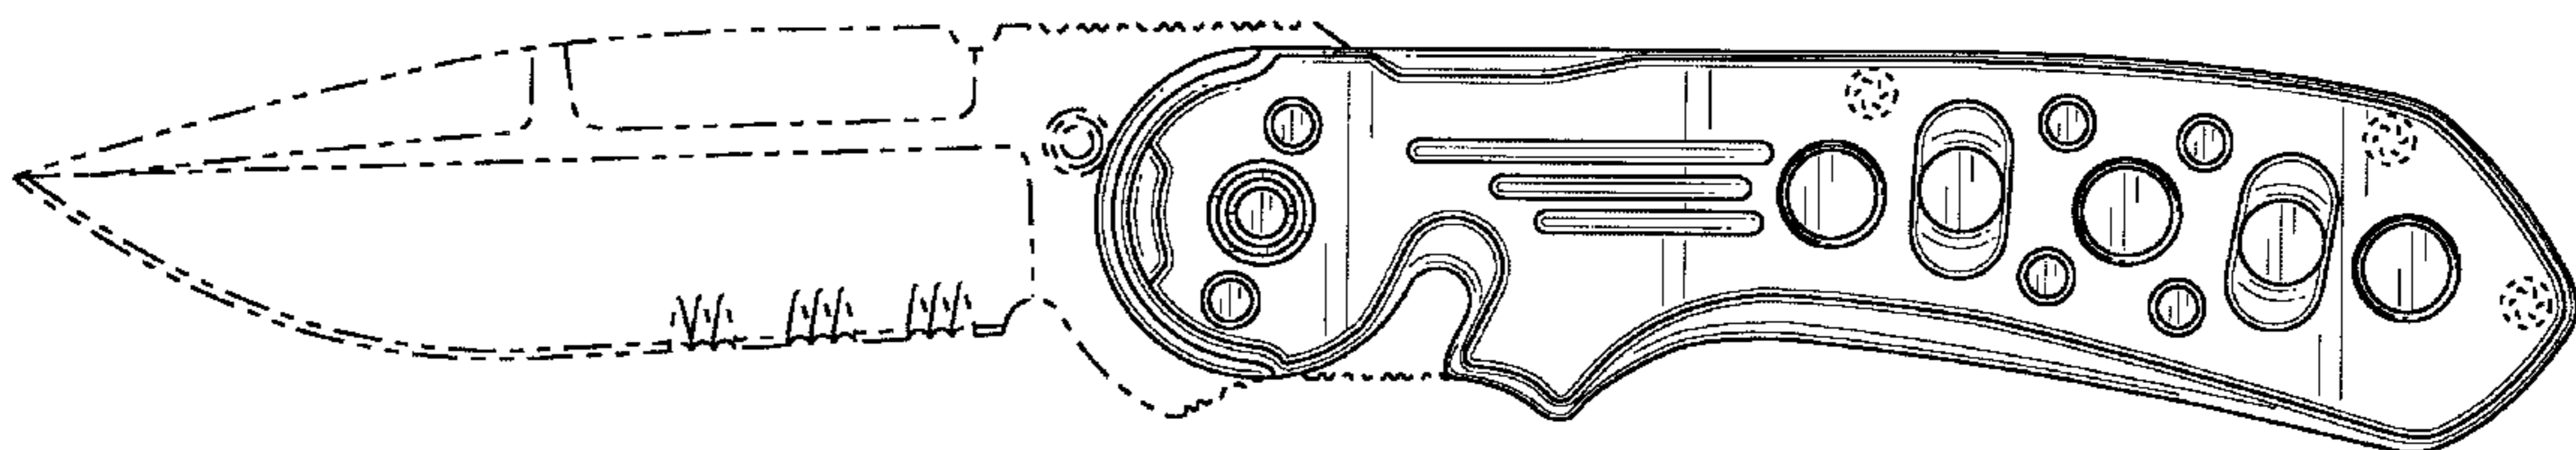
is a bottom plan view of the knife handle of FIG. 1;
